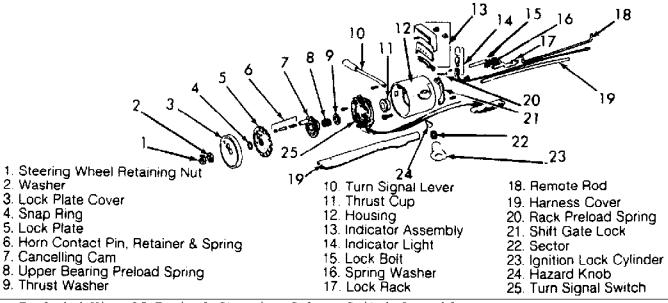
Exploded View Of Typical Steering Column Switch Assembly Courtesy of Chrysler Corp.
